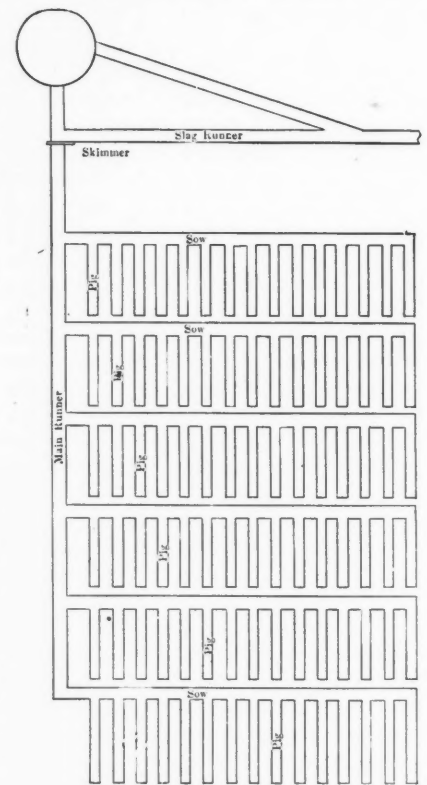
ARRANGEMENT OF CASTING HOUSE
